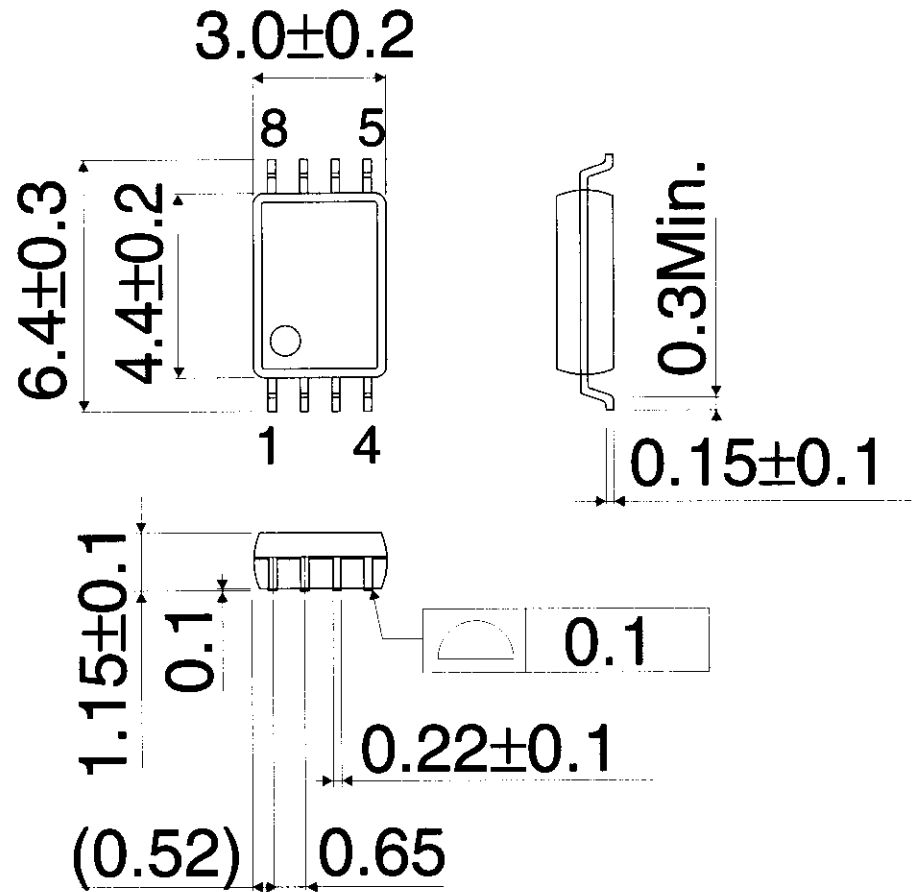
Outline Dimensions SSOP-B8(BR93L66RFV-W)
